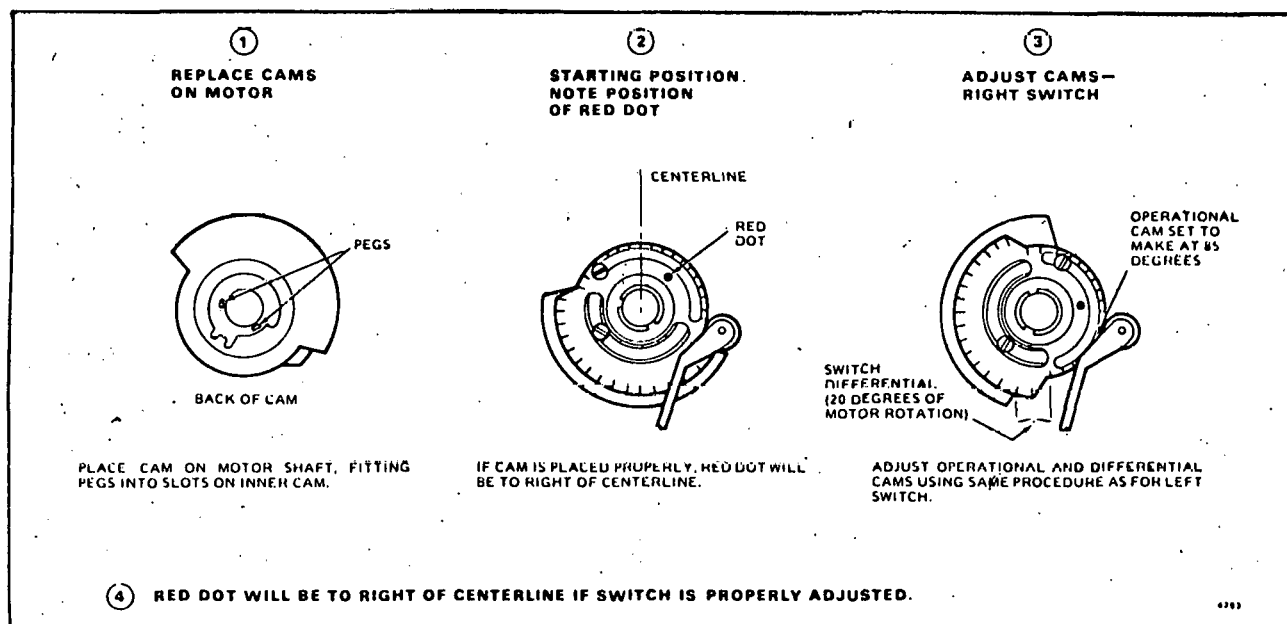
ADJUST MAKE AND BREAK POINTS OF RIGHT AUXILIARY SWITCH.
